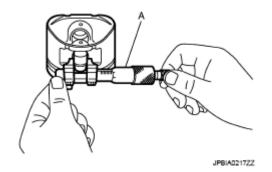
Measuring Inner Diameter Of Piston Pin Hole Using Inside Micrometer Courtesy of NISSAN MOTOR CO., U.S.A.
